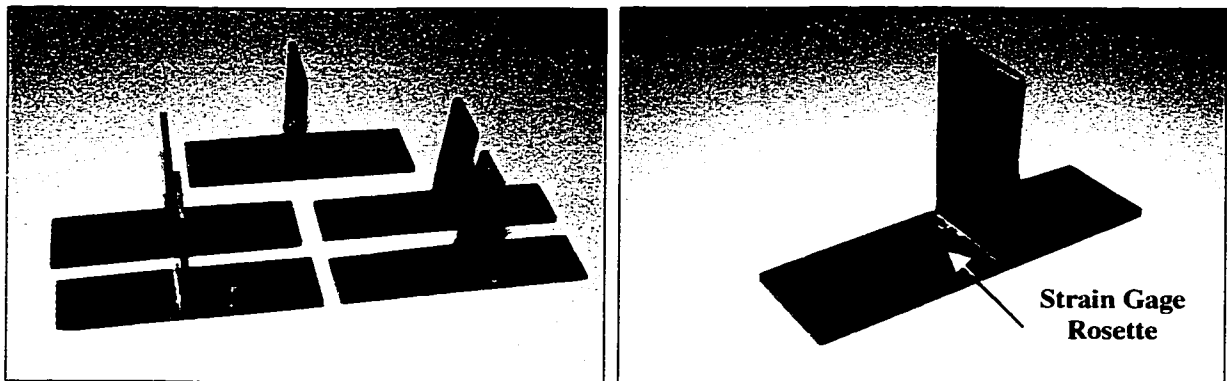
Typical T-300/PR520 T-Joint Simple Support Tension Specimen: (a) Specimen Set and (b) Typical Specimen Showing Instrumentation.
